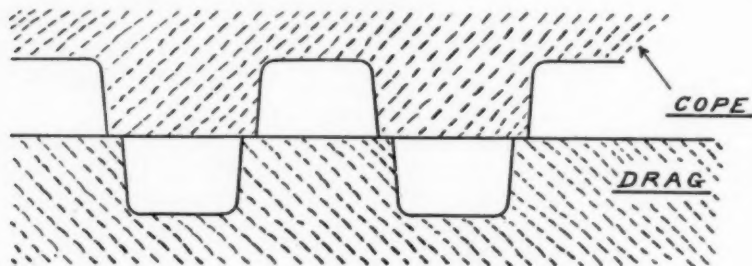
CASTINGS STAGGERED IN DRAG AND COPE
